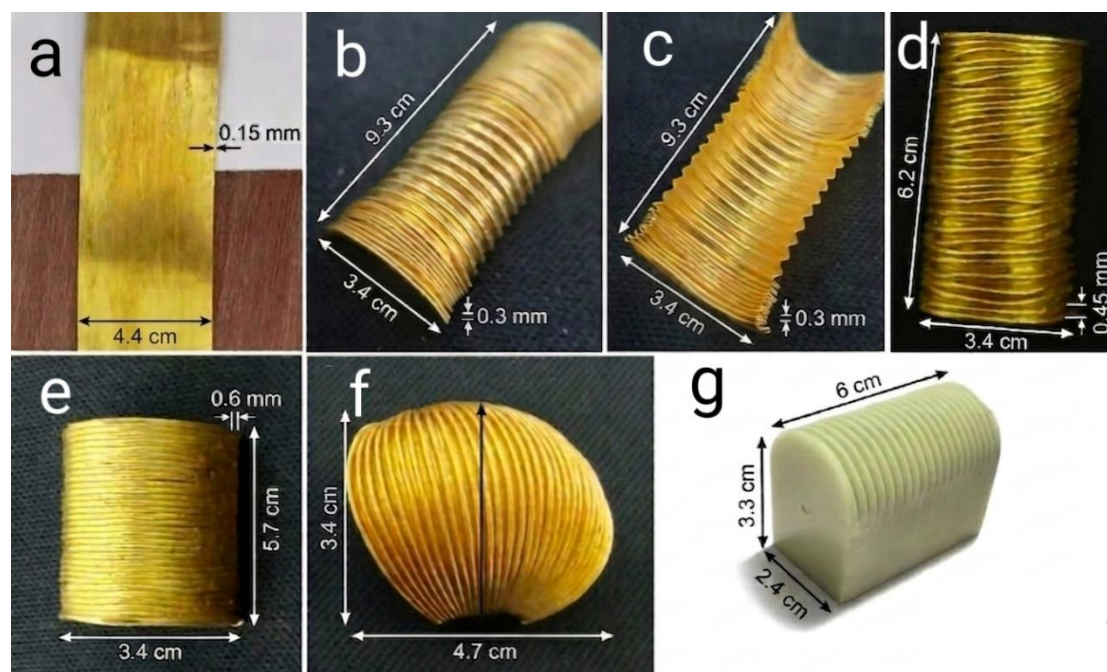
| Tool-assisted forming of gold foil and the jade mould used in the reconstruction of the Jin zhe si technique.
